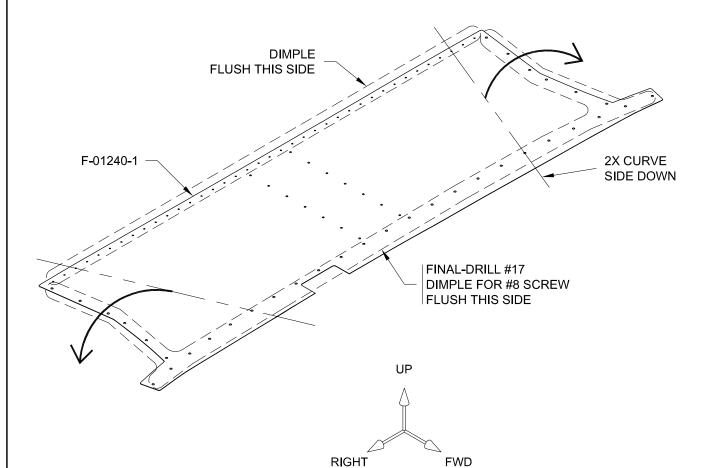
ROLLING THE UPPER FORWARD FUSELAGE SKIN
